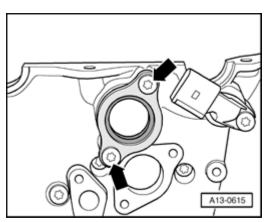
Removing/Installing Sealing Flanges For Camshaft Adjuster On Left/Right Covers For Timing Chain
